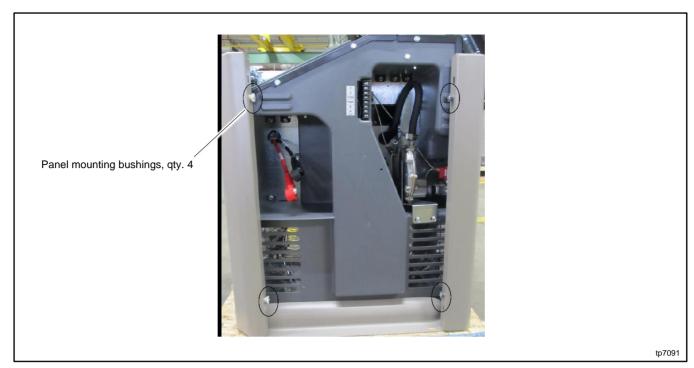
Panel Mounting Bushings (air intake end panel shown)
